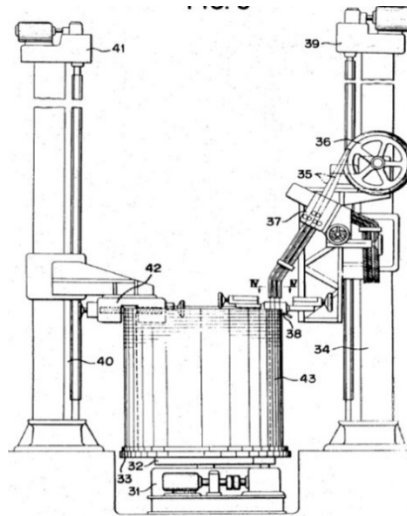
Technical drawing showing a thick walled circular cross-section pressure vessel (7)
